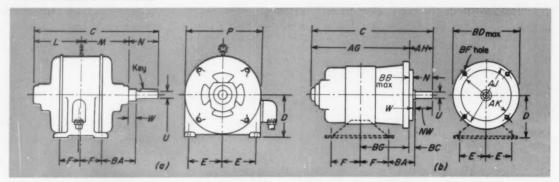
Outlines and dimensions of, a, foot-mounted and, b, Type C face-mounted fractional-horsepower motors. Dimensions D, M, N, and P are not standardized. Because NEMA 48 or 56 frames have no shaft shoulder, dimension BA is to the end of the bearing hub. (NEMA MG 1-1959: Part 3, Fig. 1 and 3b; Par. 3.10.)
